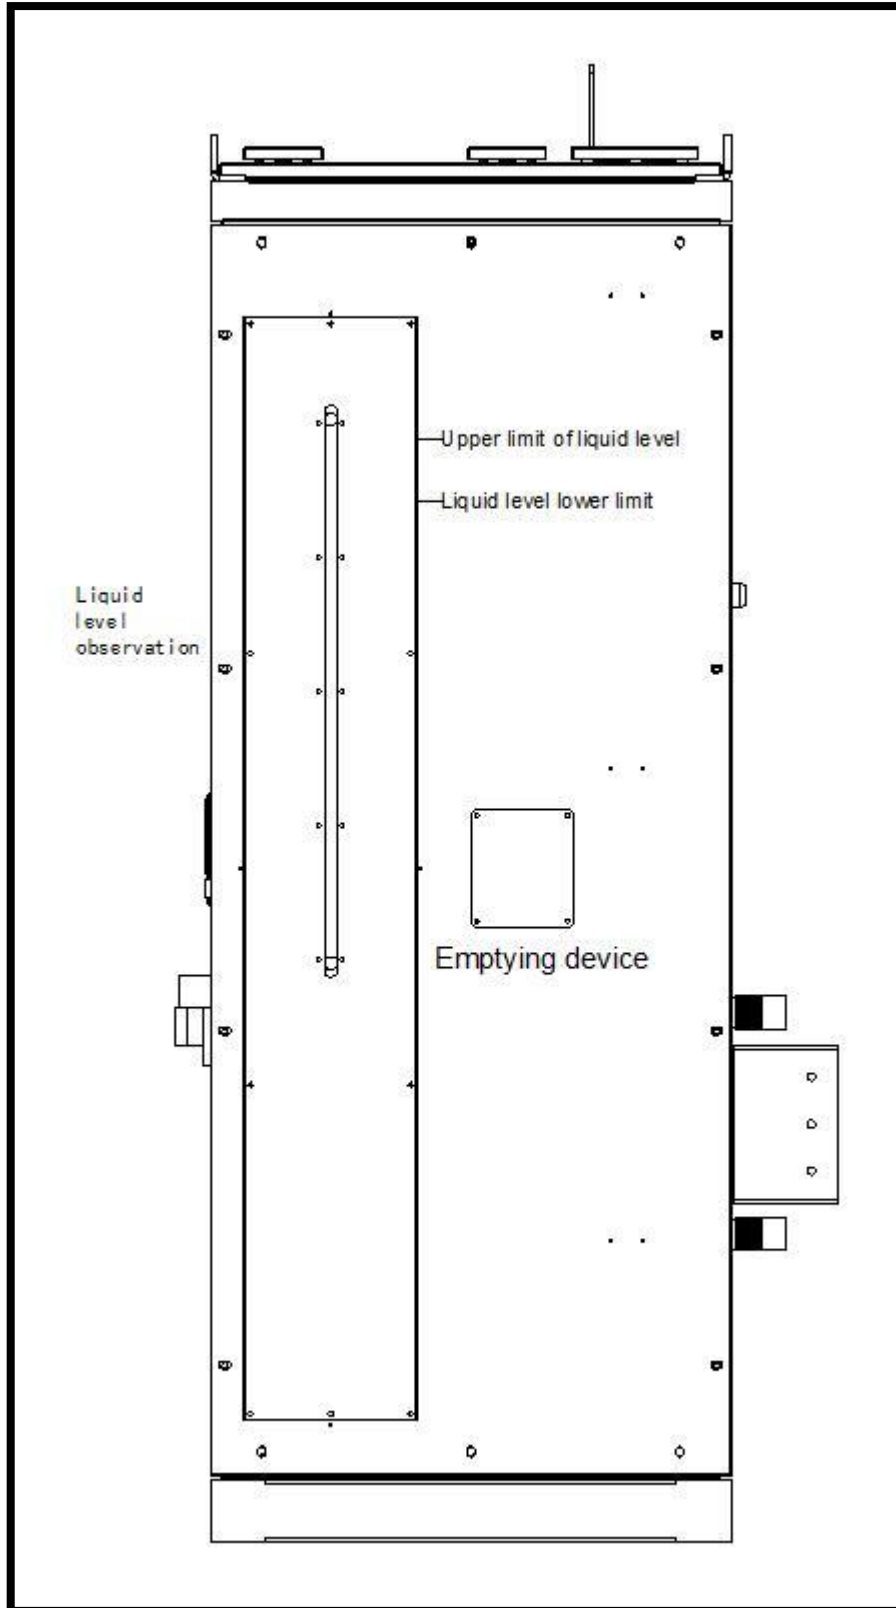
Inverter Panel Right Side View with Refrigerant Tank Cover
